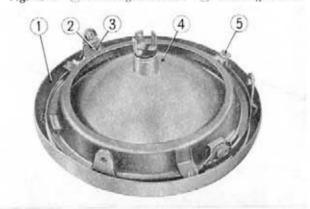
① Headlight rim ② Headlight beam unit ② Cotter pin ⑤ Adjusting screw
